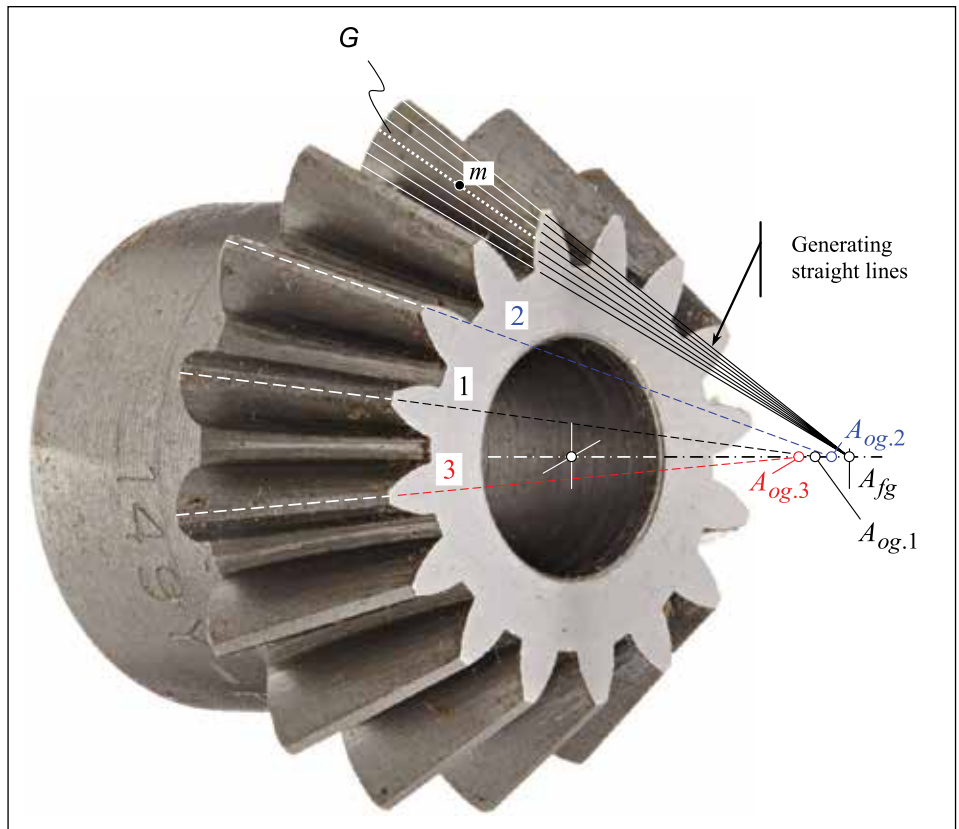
On the definition of the "tooth flank apex," A_{fg} in intersected-axes and crossed-axes gears.
